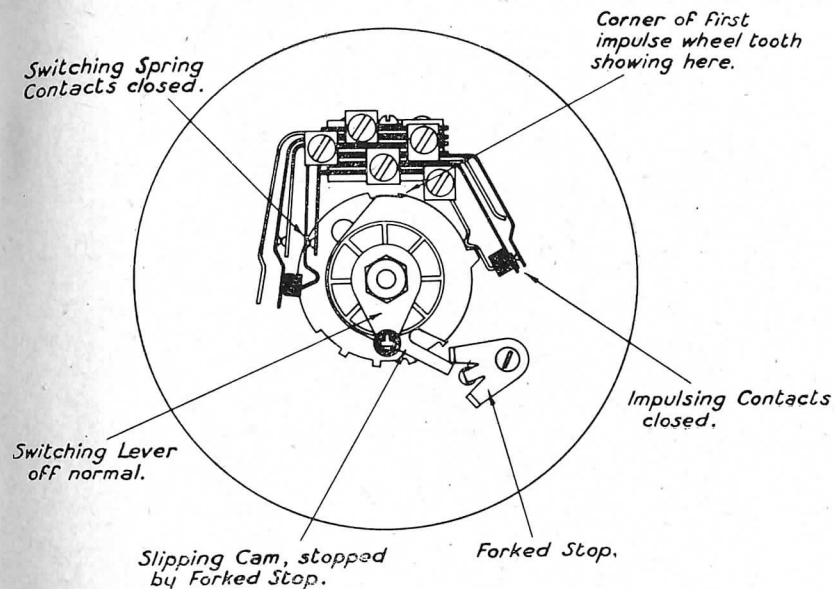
DIAL MECHANISM IMMEDIATELY PRIOR TO REMOVAL OF FINGER ON DIALLING 1
